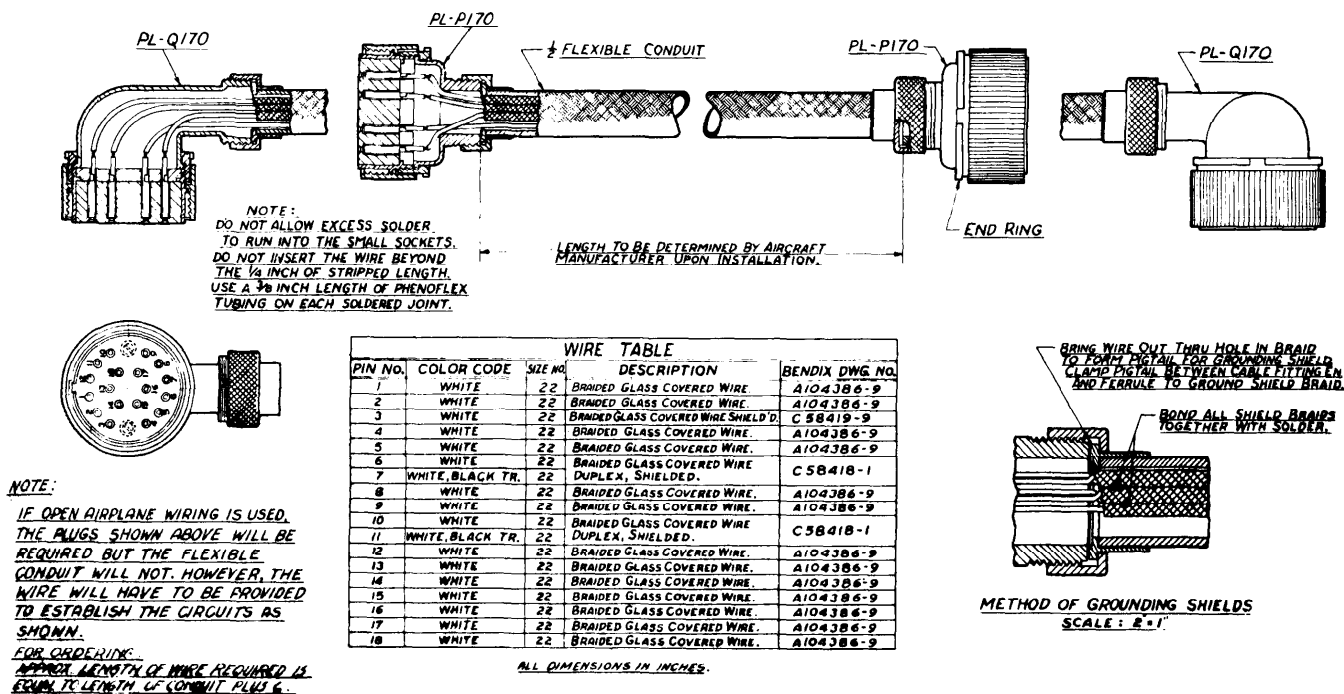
CABLE, JUNCTION BOX TO RACK, ASSEMBLY DRAWING
